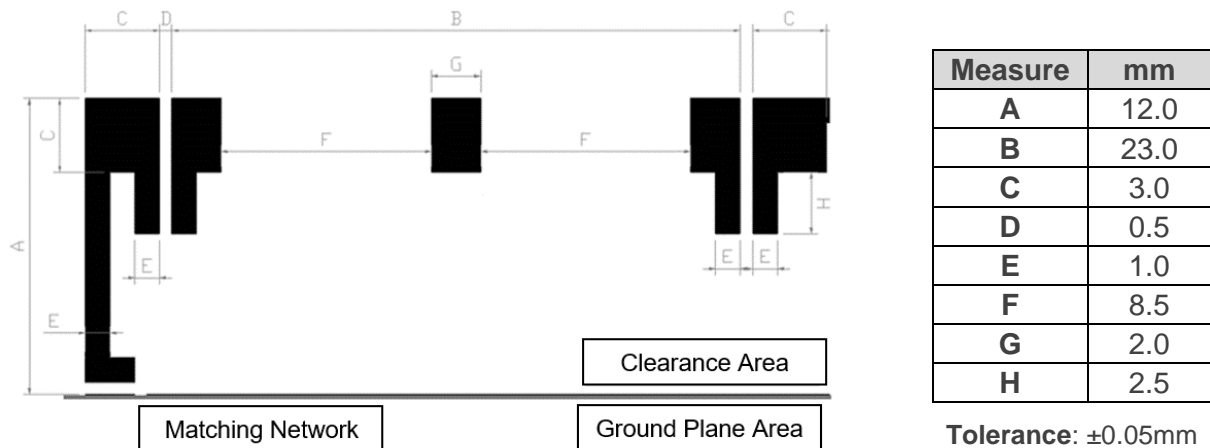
Footprint dimensions for the single chip antenna component in one port configuration.
